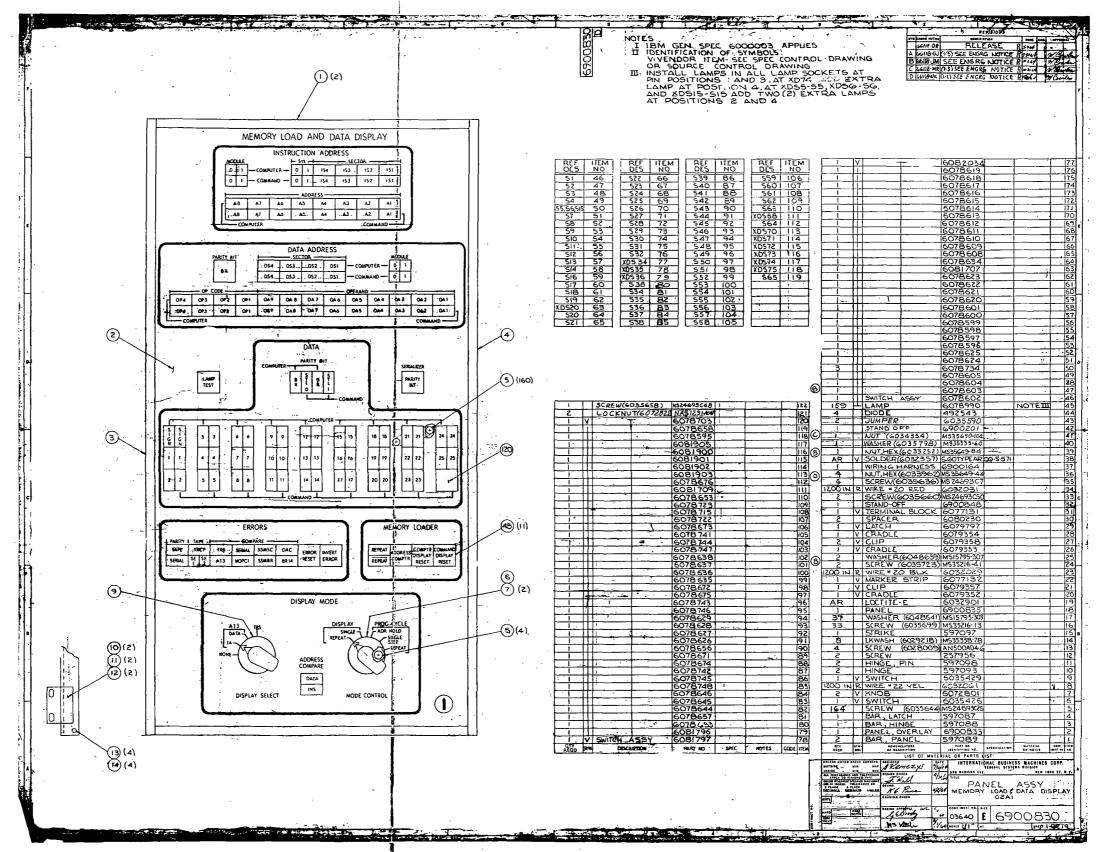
Memory Load and Data Display Panel Assembly (02A1) Assembly Drawing (Sheet 1 of 2)
